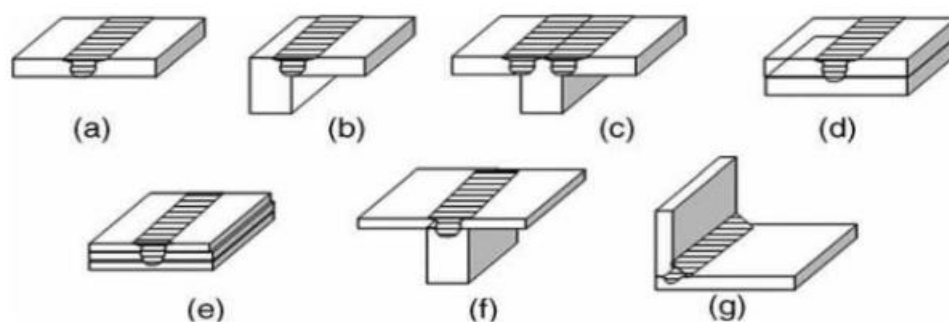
“Different designs of joints for friction stir welding:(a) Square butt joint, (b) Edge butt joint, (c) T-butt joint, (d) Lap joint, (e) Multi-layer lap joint, (f) T-lap joint, (g) Fillet joint”. [24]
